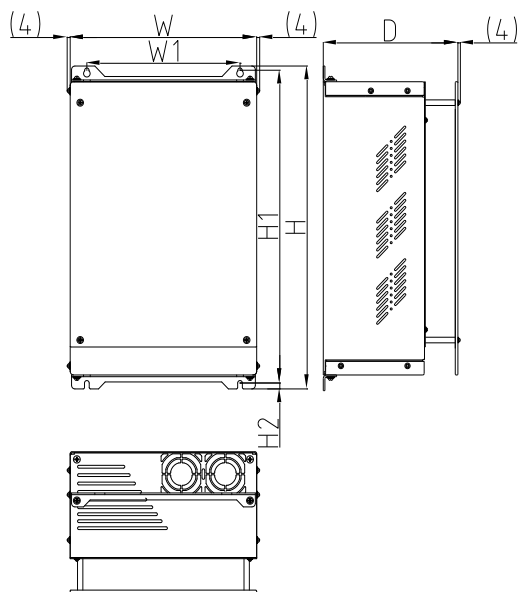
OPEN TYPE WALL-MOUNT DIMENSION
